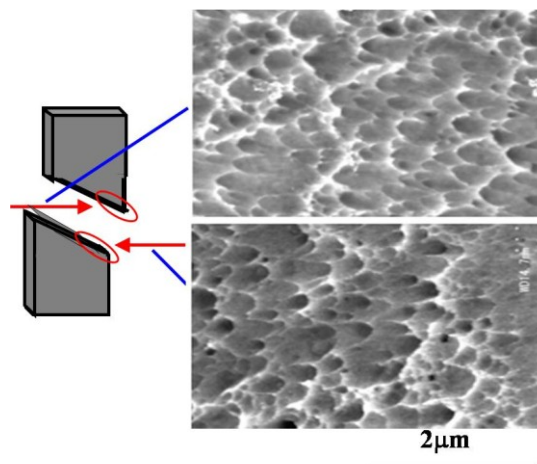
SEM micrographs of fractured surface of the Ni-16.9 at. % W tensile test specimen.
